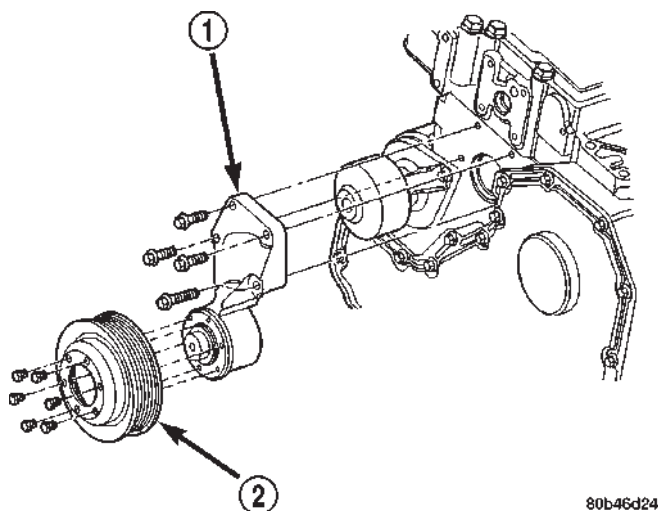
Fan Support/Hub Assembly—Removal/Installation
